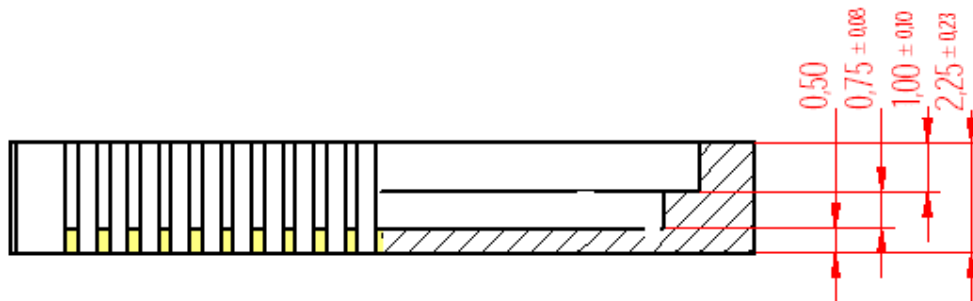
Side view of the 84-pins LCC package (all dimensions in mm).
